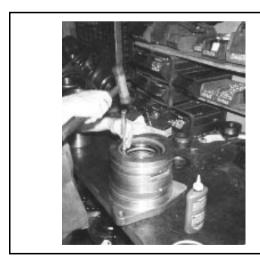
(MSSM0303AE) Installing Seals in Bearing Housing
